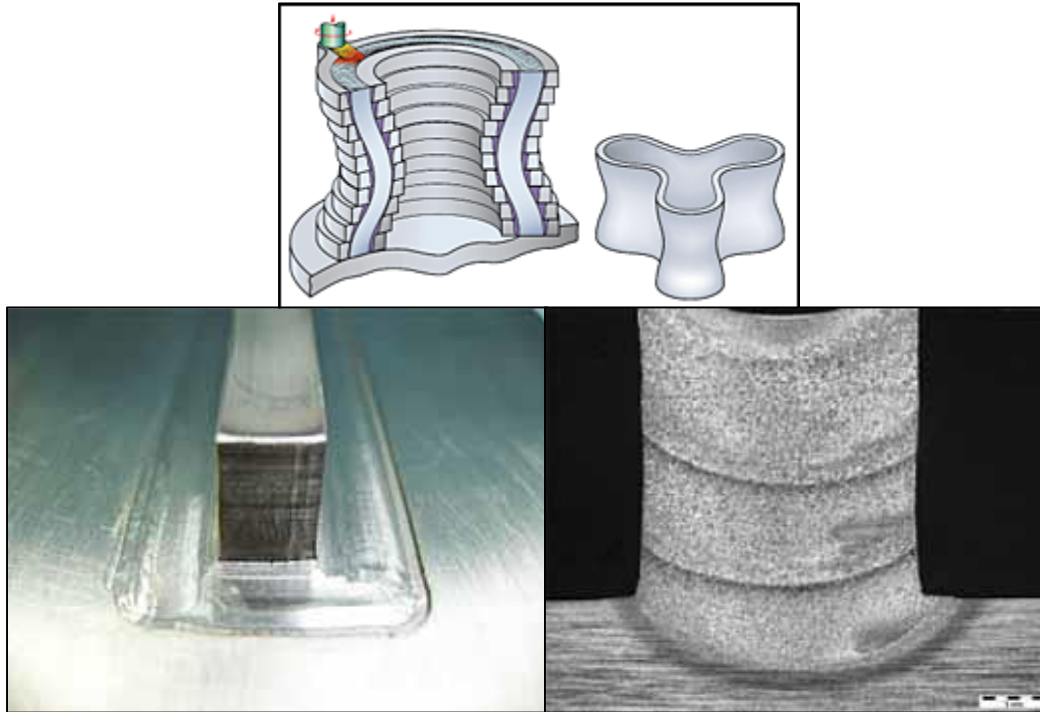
The Welding Institute Additive Friction Stir Process
